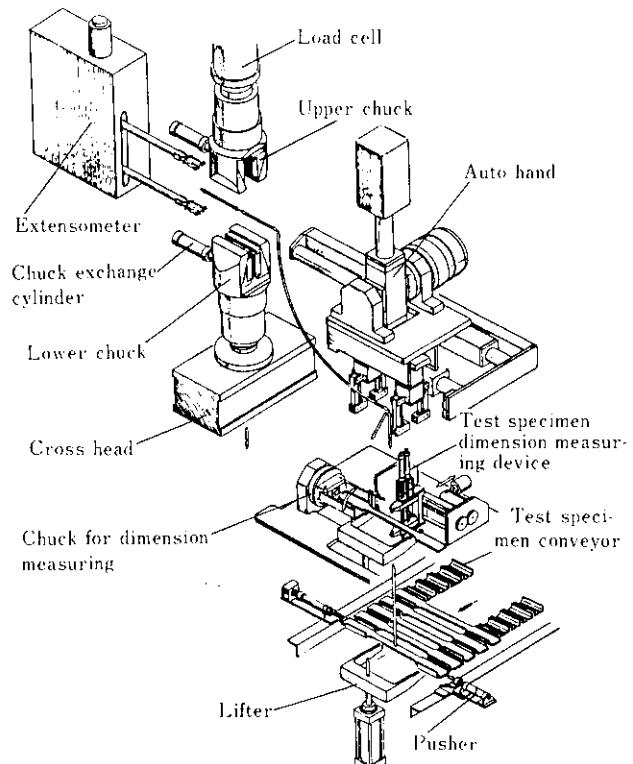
Handling and measuring devices of test specimen in automatic tensile testing machine
